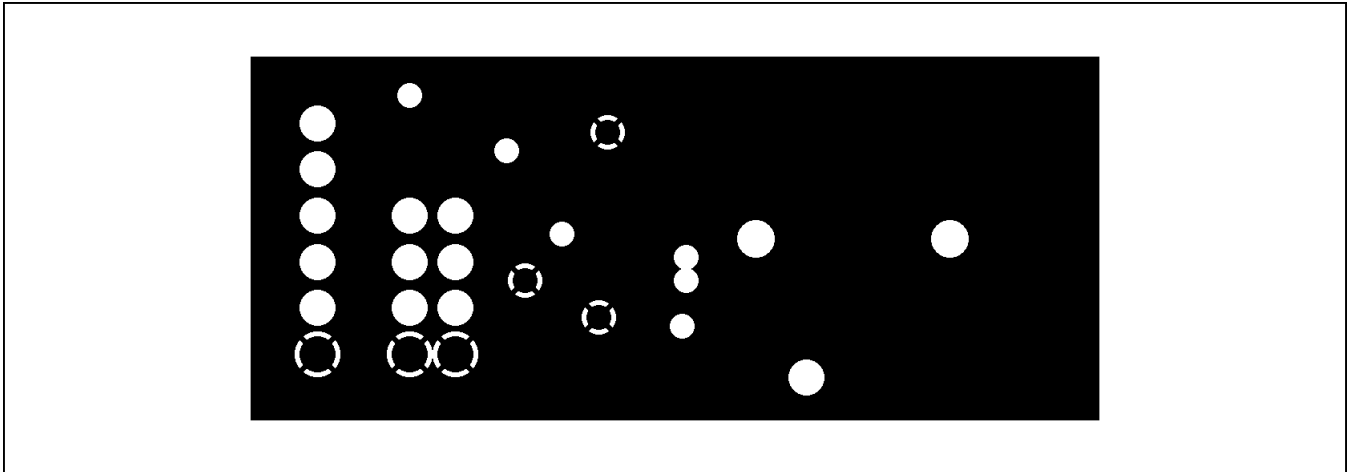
DS3231MPMB1 Peripheral Module PCB Layout—Inner Layer 2 (Ground)
